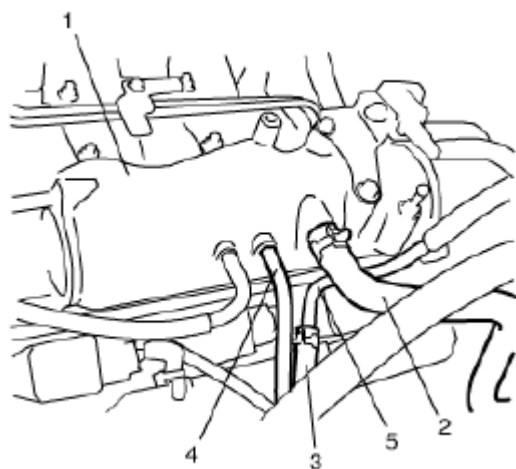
Identifying EGR Valve Assembly Connector
